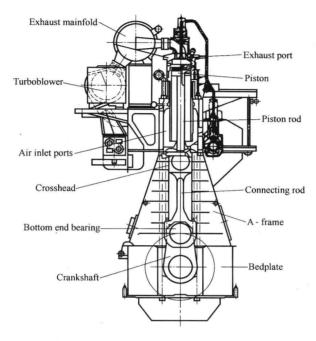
Cross-section of a two-stroke diesel engine
